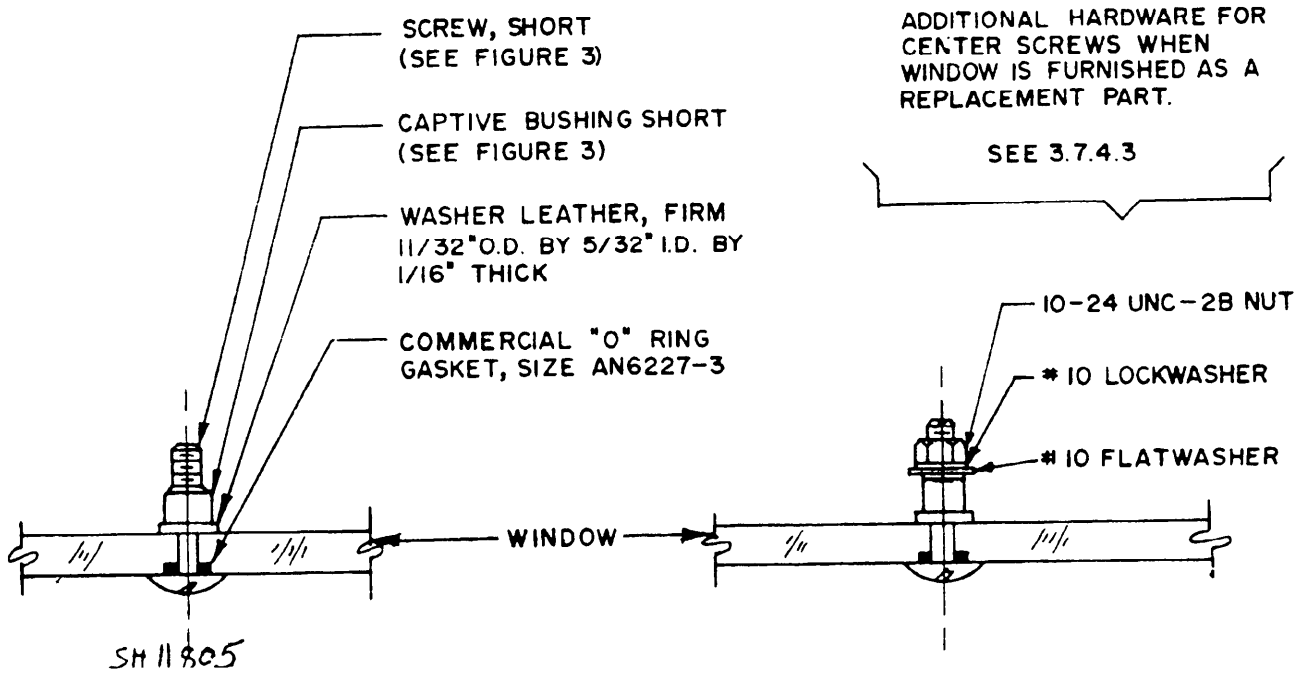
Securing screw assembly (short) for watertight window assemblies.
